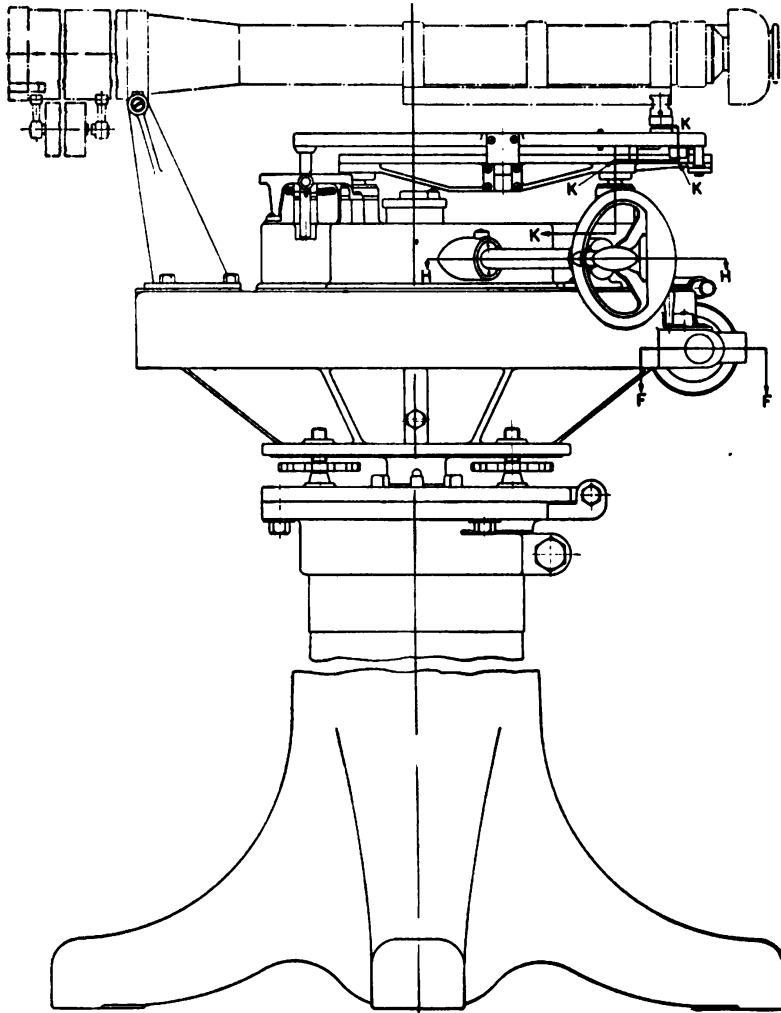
Depression position finder M1—assembled views—Continued.
